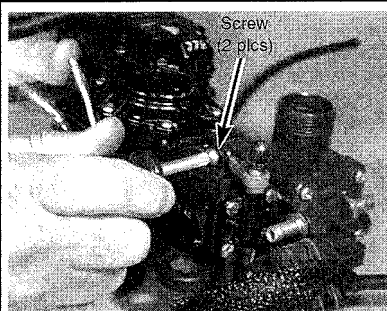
then remove the retainers securing it to the fuel component bracket or powerhead
